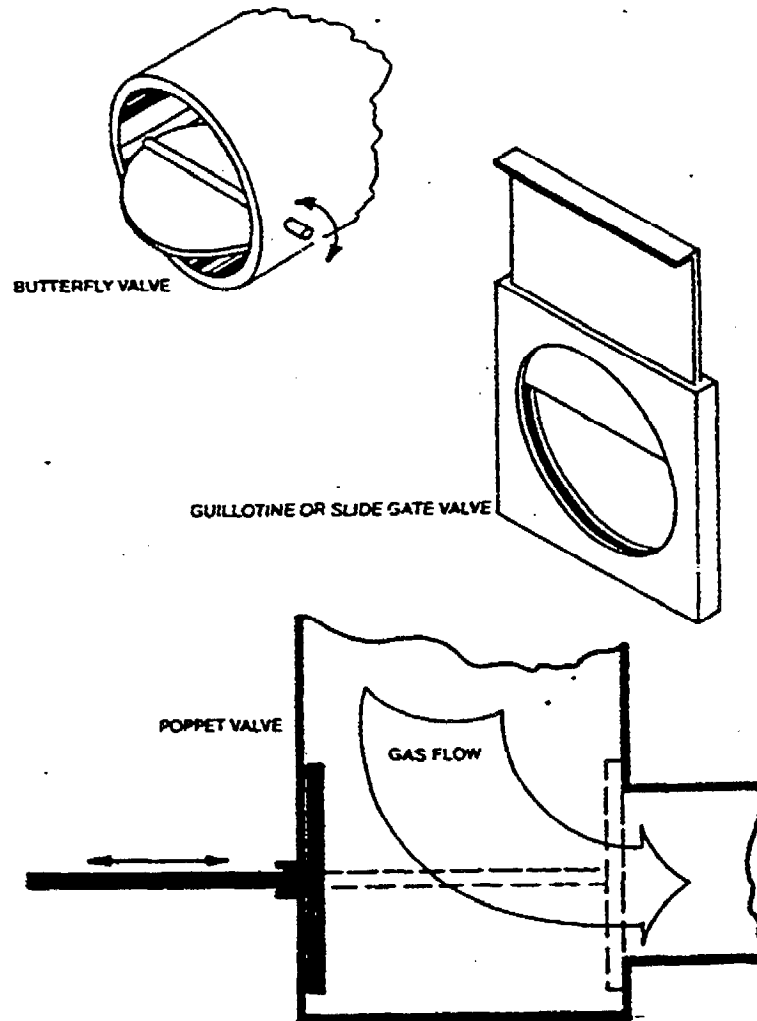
Typical Damper Valves Used in Baghouse Systems ¹¹
